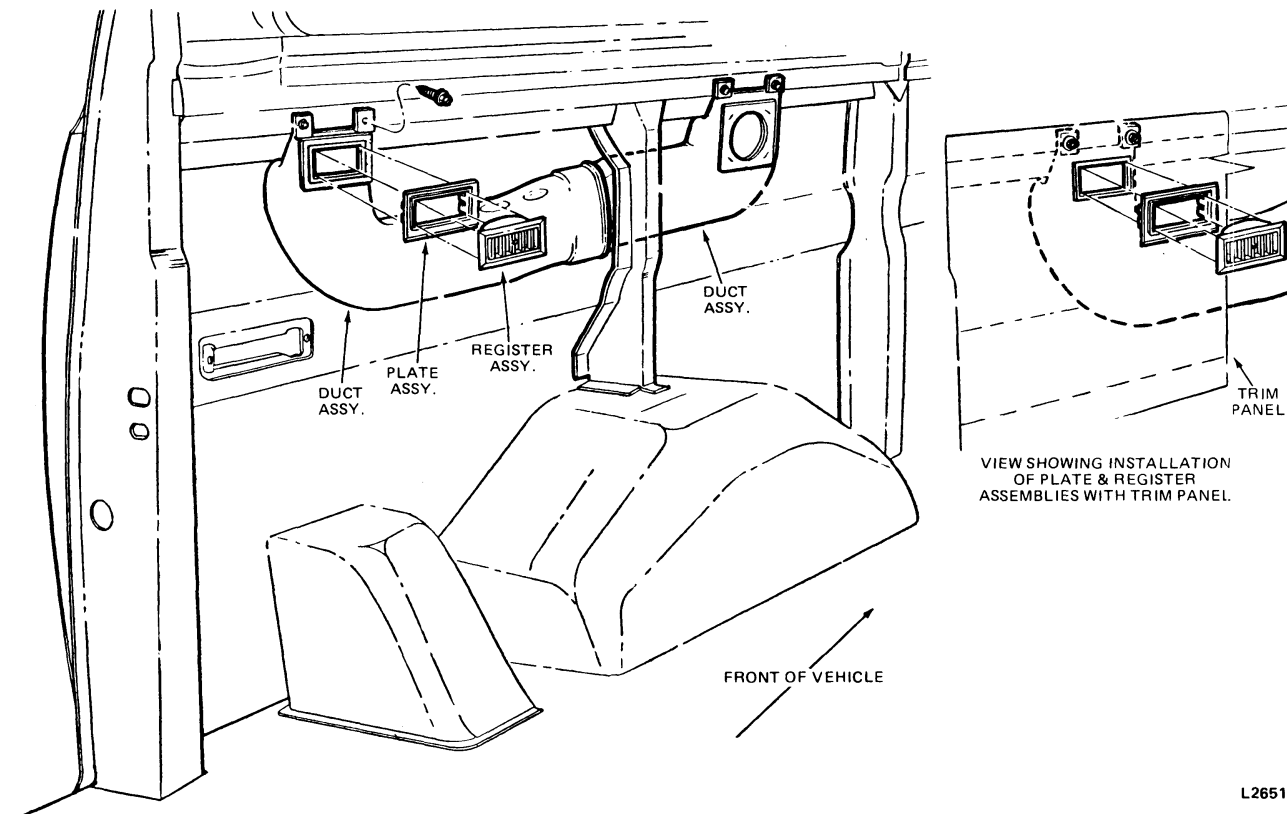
Super Wagon Auxiliary Duct Assembly—Removal and Installation
